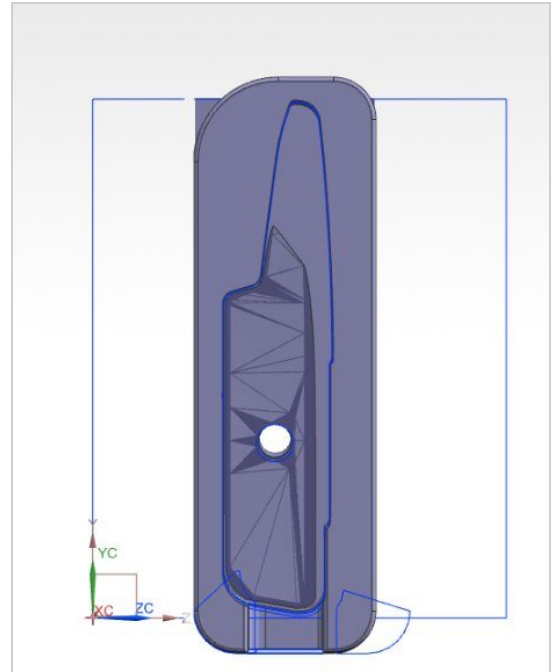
A section view of the fixture, showing its internal walls.
